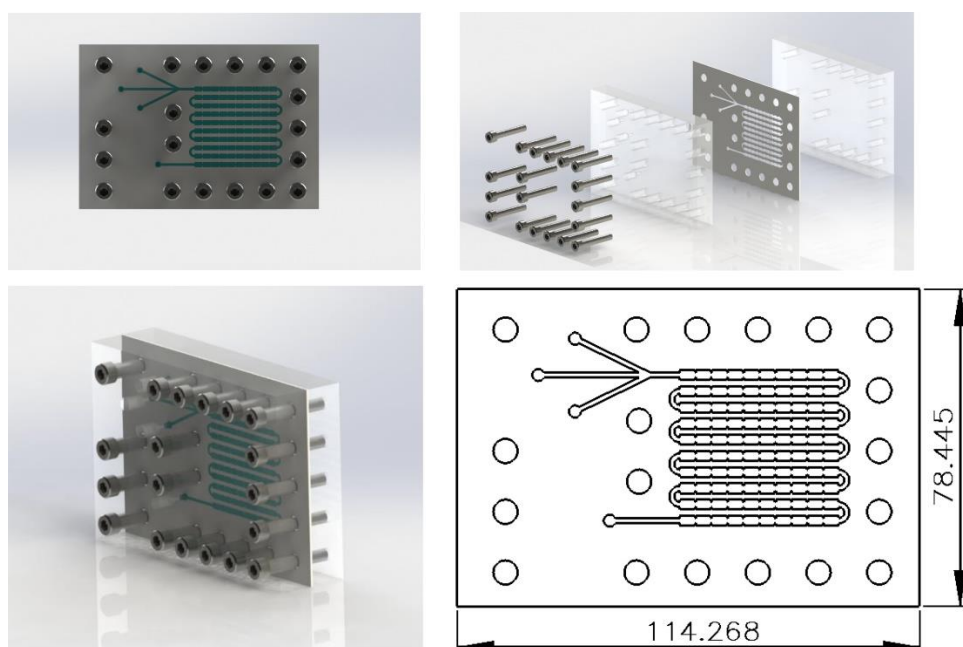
Proposed design of a plate mCOBR for process research and development. Top left: view of the front of the device, with three inlets and an outlet. Top right: exploded view showing the components. Bottom left: 3D view of the device. Bottom right: drawing of a possible insert for the device, with units in mm.
